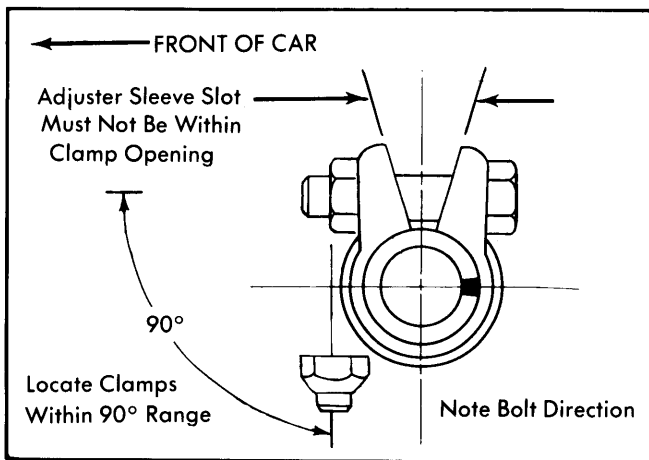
Tie Rod Clamp Positioning (Toronado)
